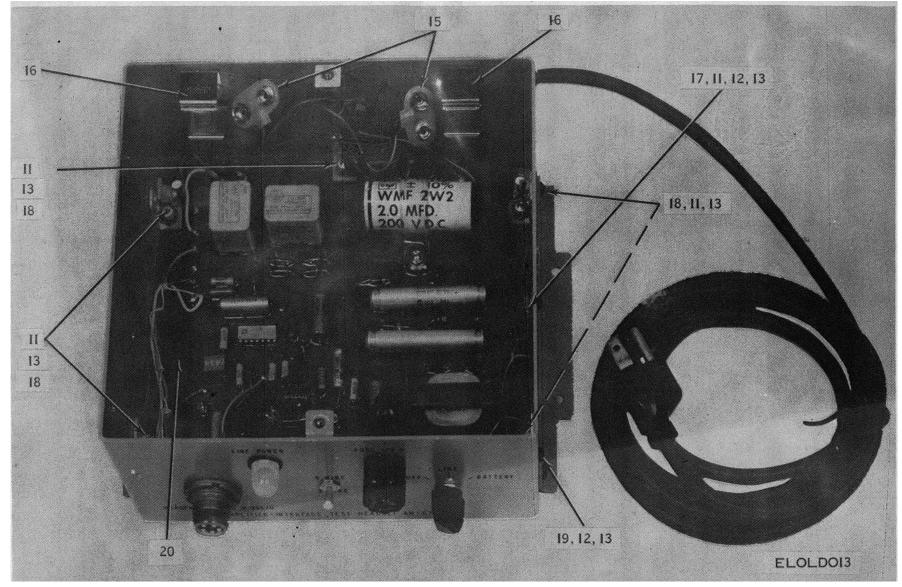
(3) Main Housing Assy., Front View-Without Shield.
